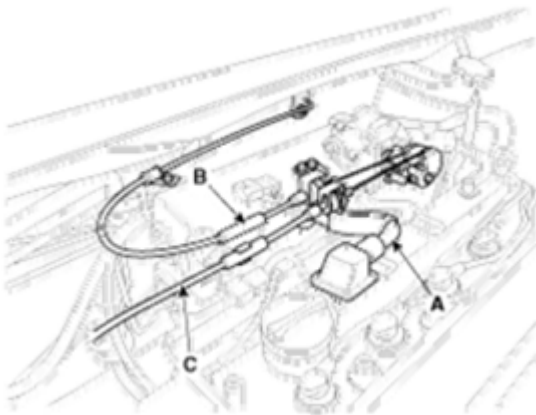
Identifying PCV Hose, Accelerator Cable, & Auto-Cruise Cable
